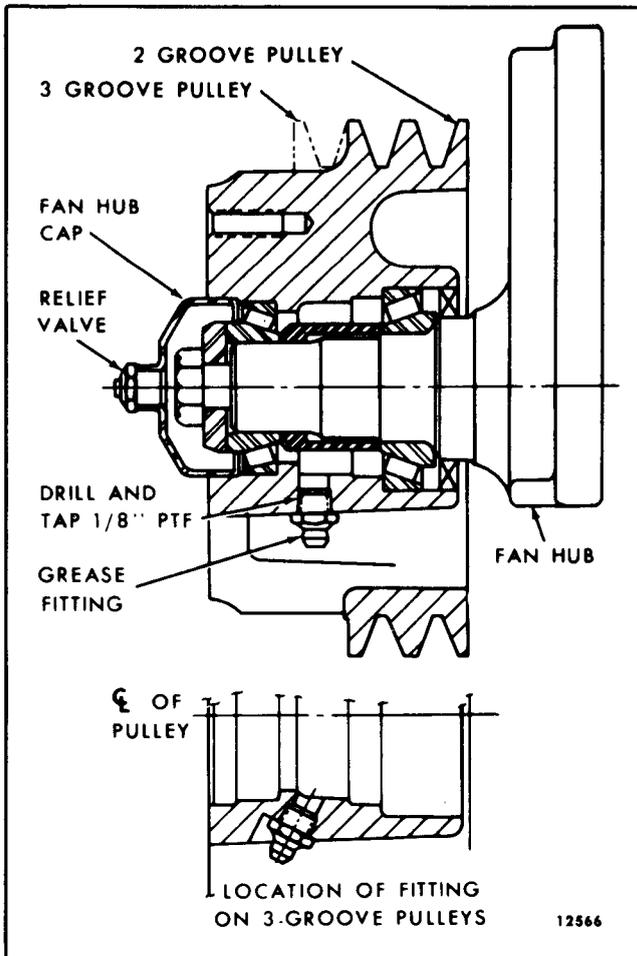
Location of Fan Hub Grease Fitting and Relief Valve
